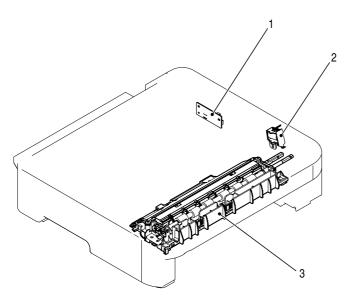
Location of 250-sheet tray solenoid and printed circuit assembly
